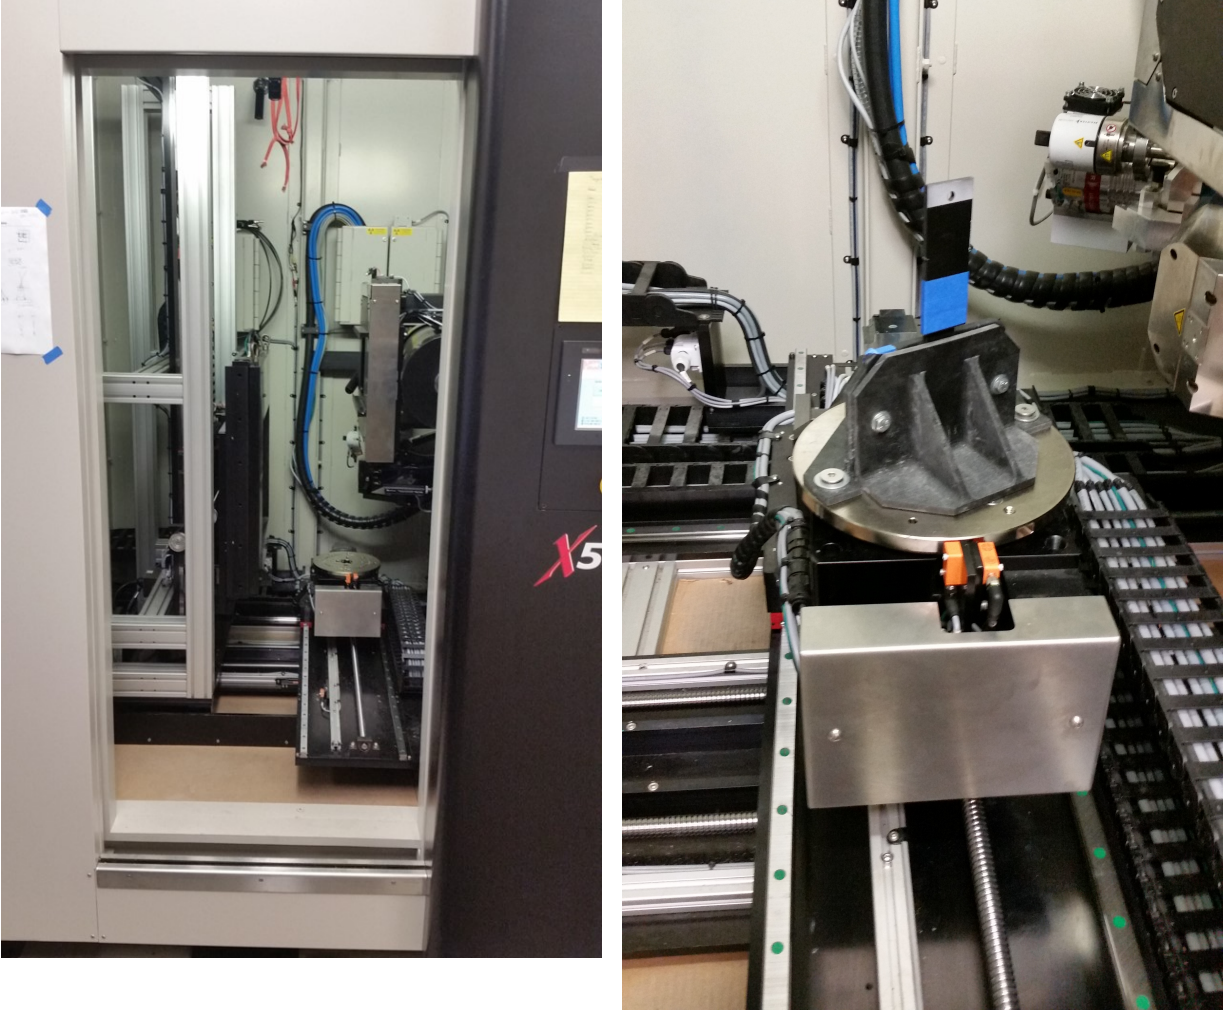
Left: Detector panel and turntable in position. Right: Specimen clamped in fixture mounted to turntable.
